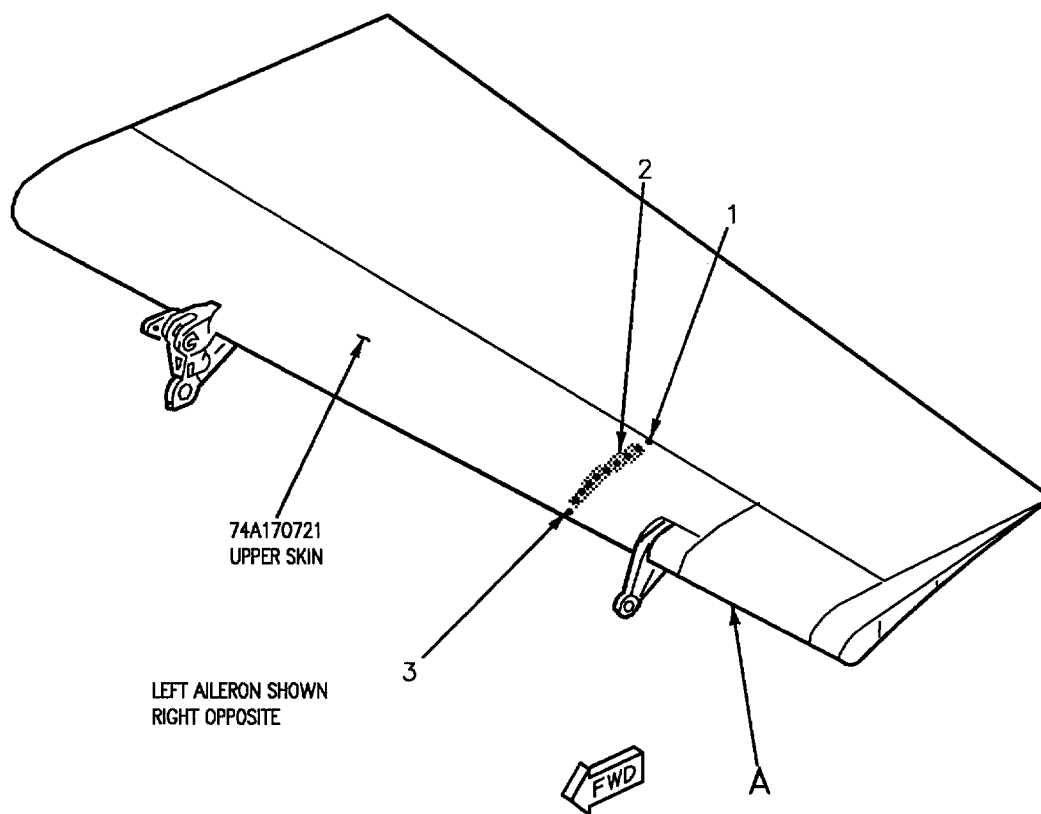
Lower Center Skin Repair at Outboard Hinge (Sheet 1)
